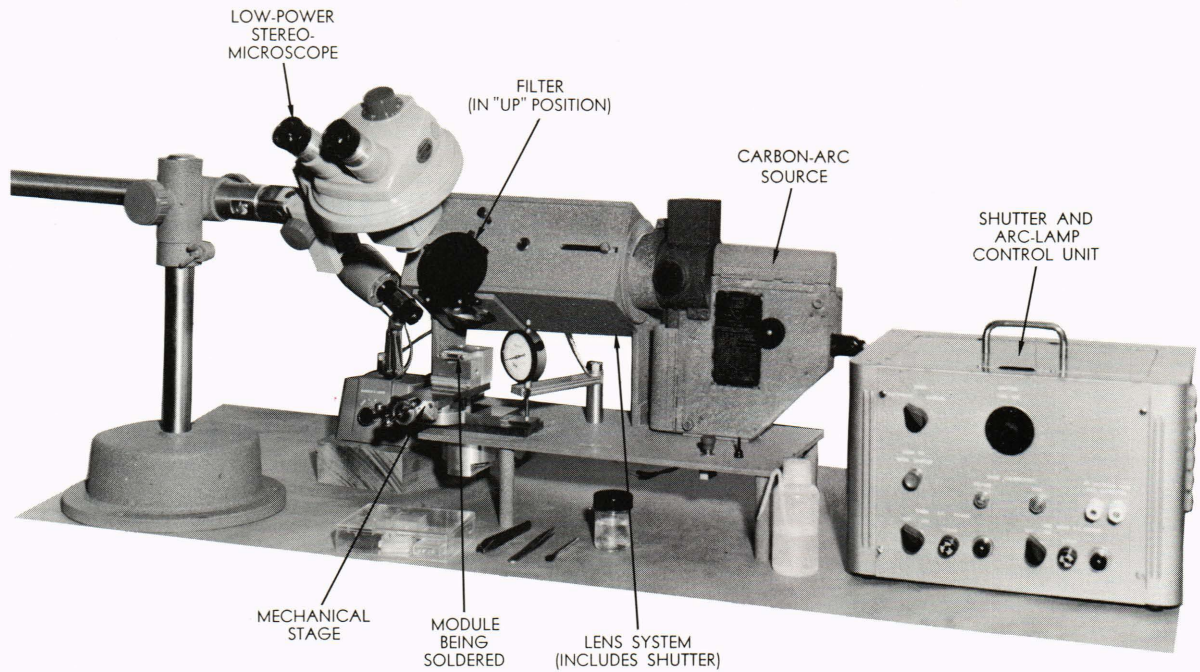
Laboratory equipment used to implement the optical soldering concept.
